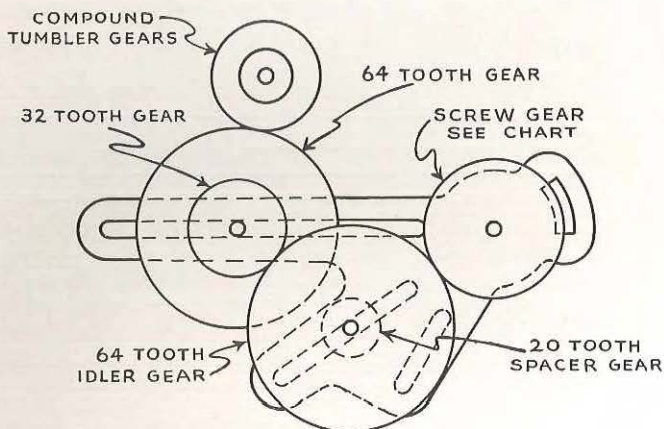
Gear set-up for 18 through 32 threads per inch.
